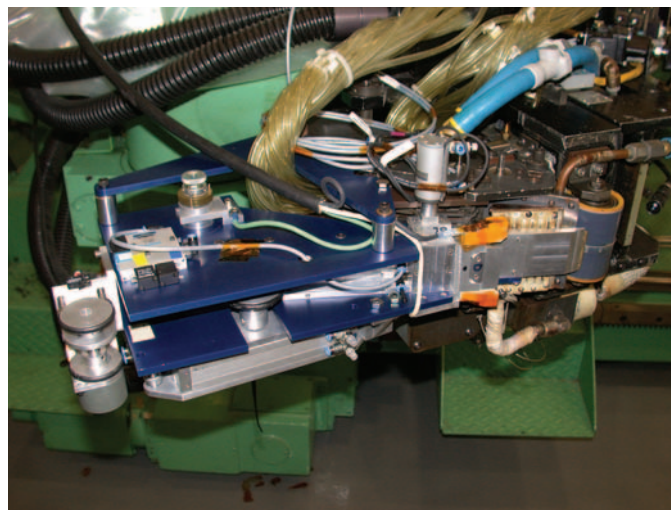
The fully integrated film module (left) attached to the fiber placement machine head.
